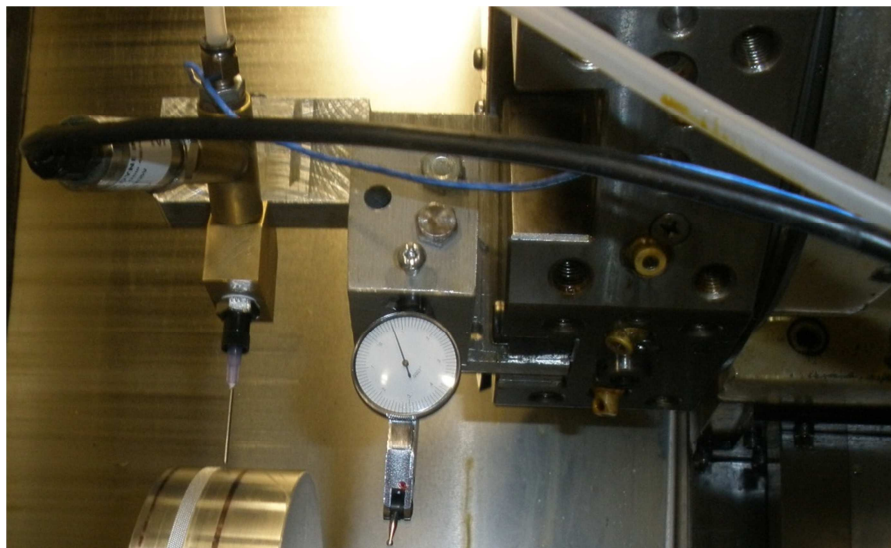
Pneumatic sensor mounting in lathe based experiments.
